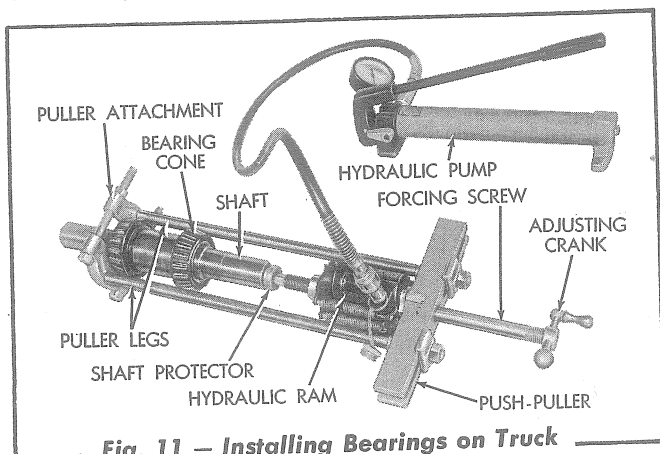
Installing Bearings on Truck Wheel Shaft
